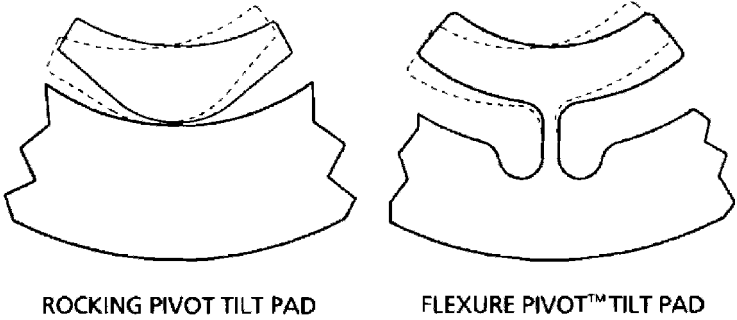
Radial Flexure Pivot tilt pad bearings. (*Bearings Plus, Inc., Houston, TX.*)
